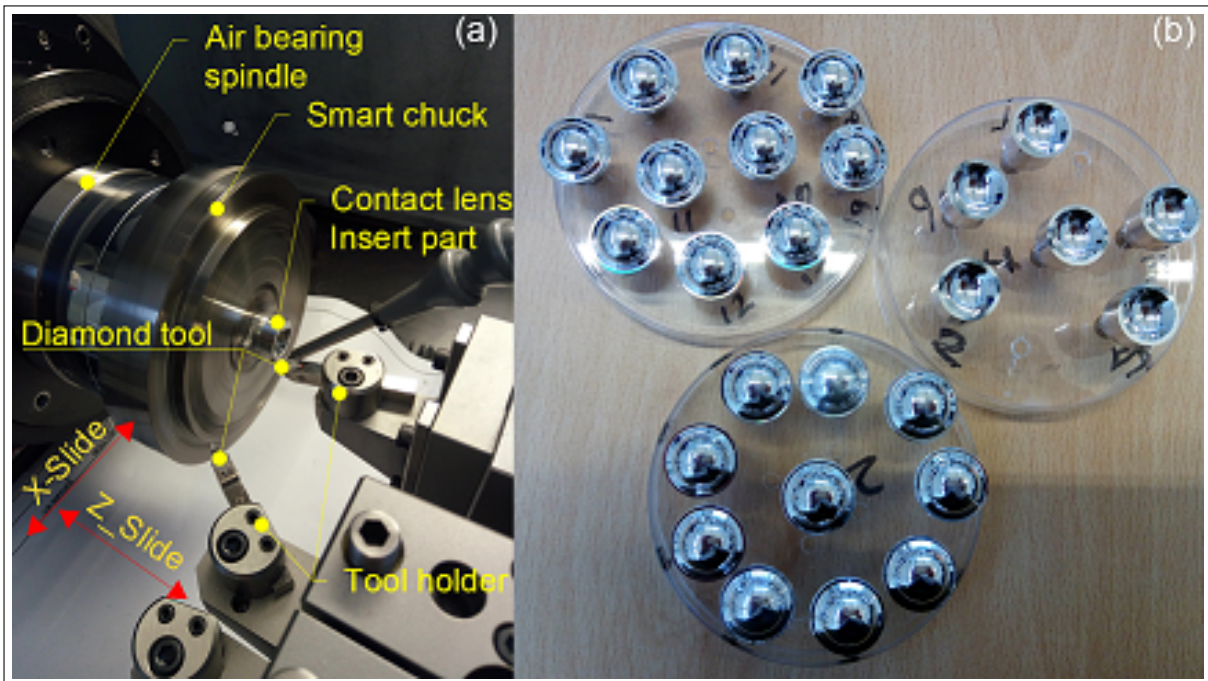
Photograph of contact lenses insert part ultraprecision machining: (a) Moor Nanotechnology DTM; (b) finished product of the concave/convex contact lenses insert moulds
